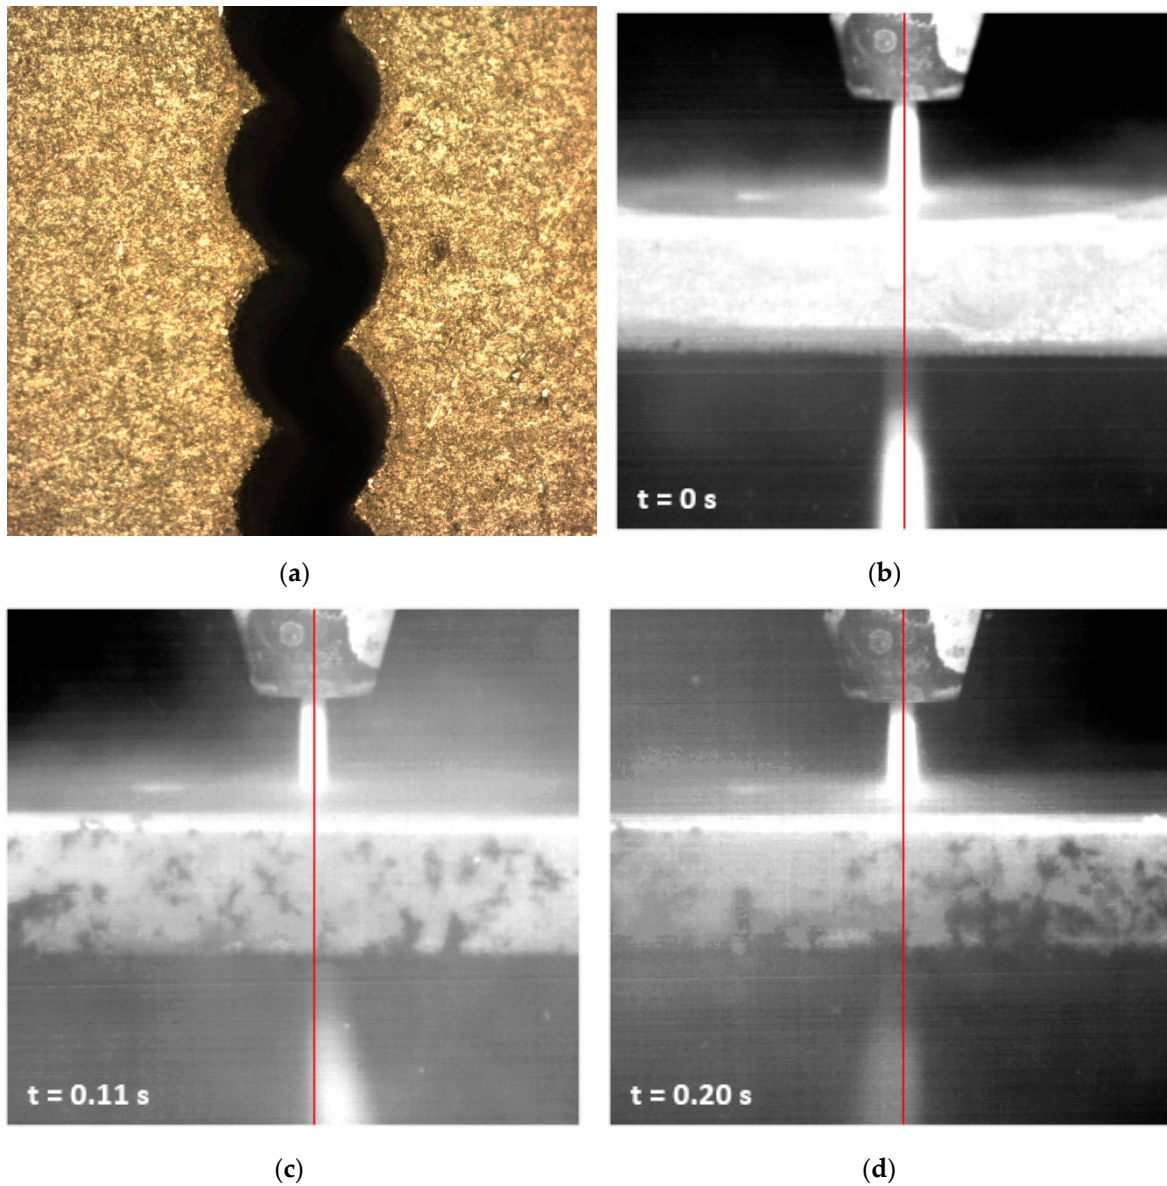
(a) SOM image. Jet output. Test 21. WP = 250 MPa; AMFR = 170 g/min; TFR = 500 mm/min; (b) Piercing frame; (c) Right jet deflection frame; (d) Left jet deflection frame.
